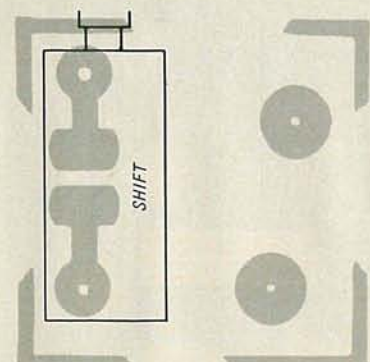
THE SINGLE SOLENOID on the SHIFT board mounts as shown.
